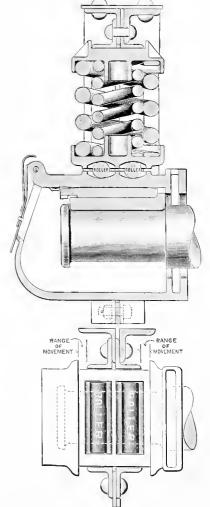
"Creco" Side Bearing, Style 4A, for Passenger Trucks. Chicago Railway Equipment Co.
